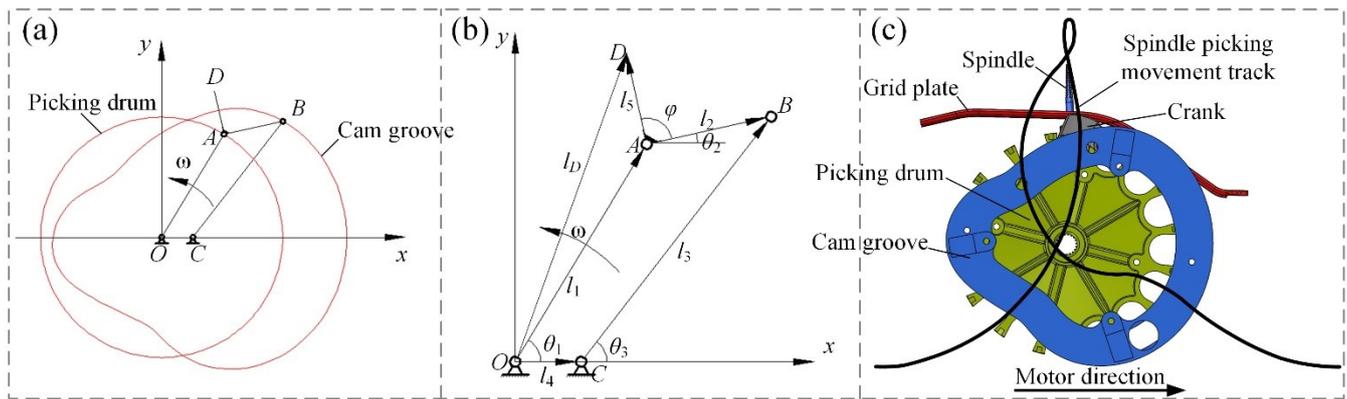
Kinematics analysis of the spindle picking process: (a) variable rod length double crank guide rod mechanism, (b) closed vector polygon, and (c) spindle-picking movement track.
